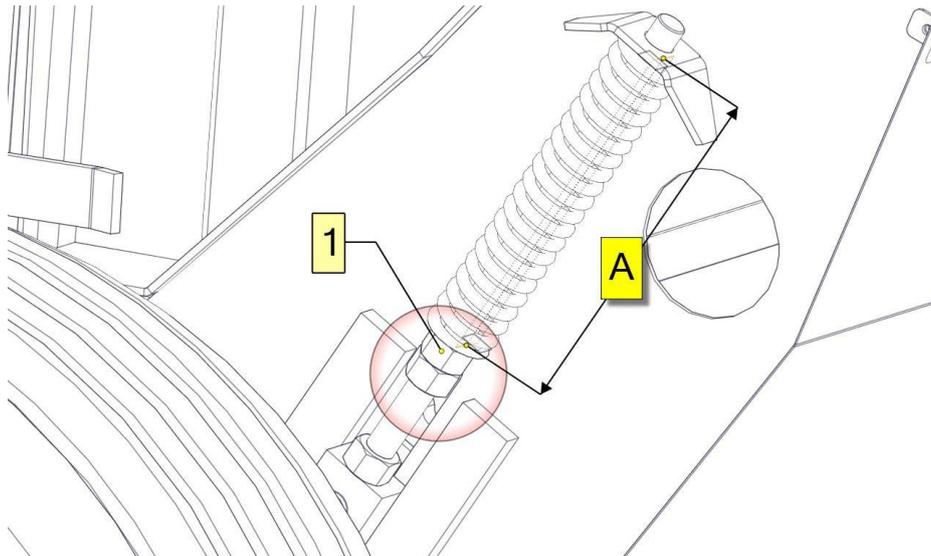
Adjusting the tension of the chain and rod conveyor set of the Z587 baler
